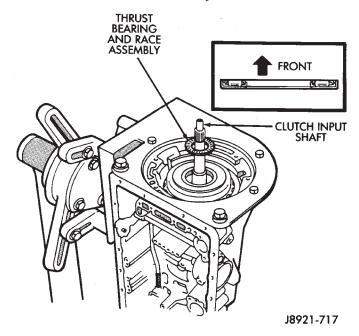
Installing Input Shaft Thrust Bearing And Race Assembly
